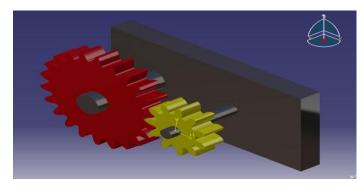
Meshing of Gear Wheel and Pinion Sharing Common Rectangular Base
